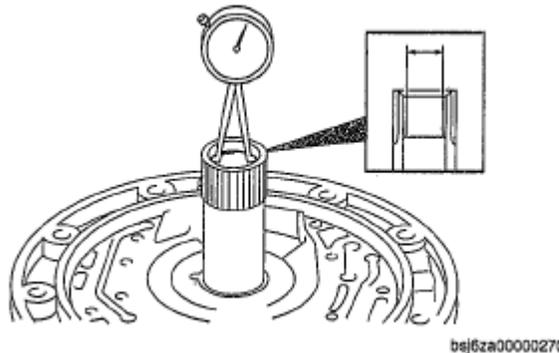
Measuring Inner Diameter Of Oil Pump Shaft Bushings Using Dial Gauge
